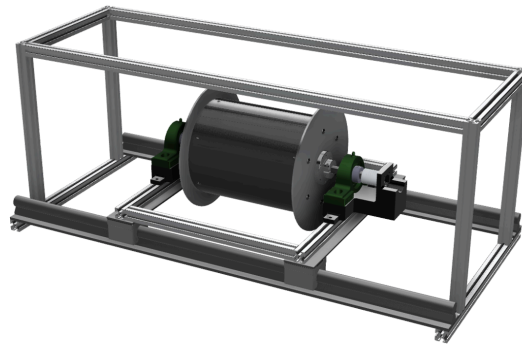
CAD model of Frame, Linear Rails, and Drum and Cart Assembly
